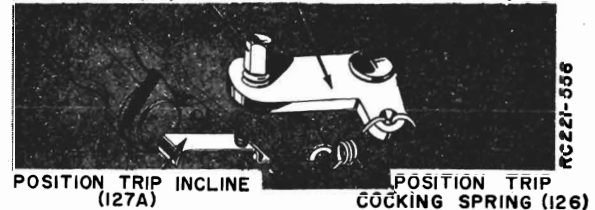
Trip Serration Plate, Showing Position Trip Adjustment.
